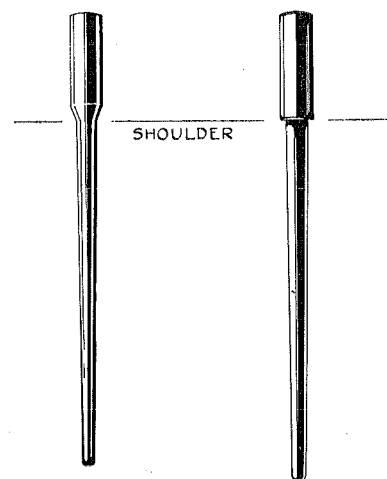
The shoulder of the needle should be flush with the under face of the piston. Two types of shoulder are in use and the correct datum point for each is shown.
